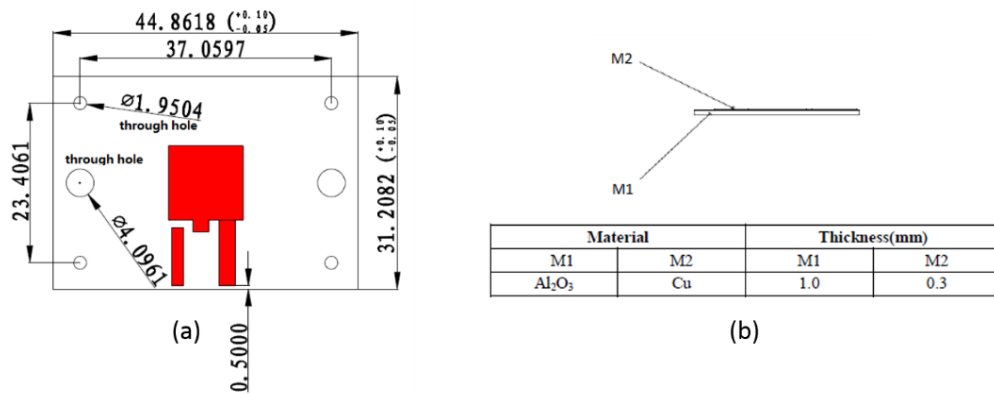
DCB design: (a) top view of DCB dimensions and (b) side view of the DCB ceramic.
